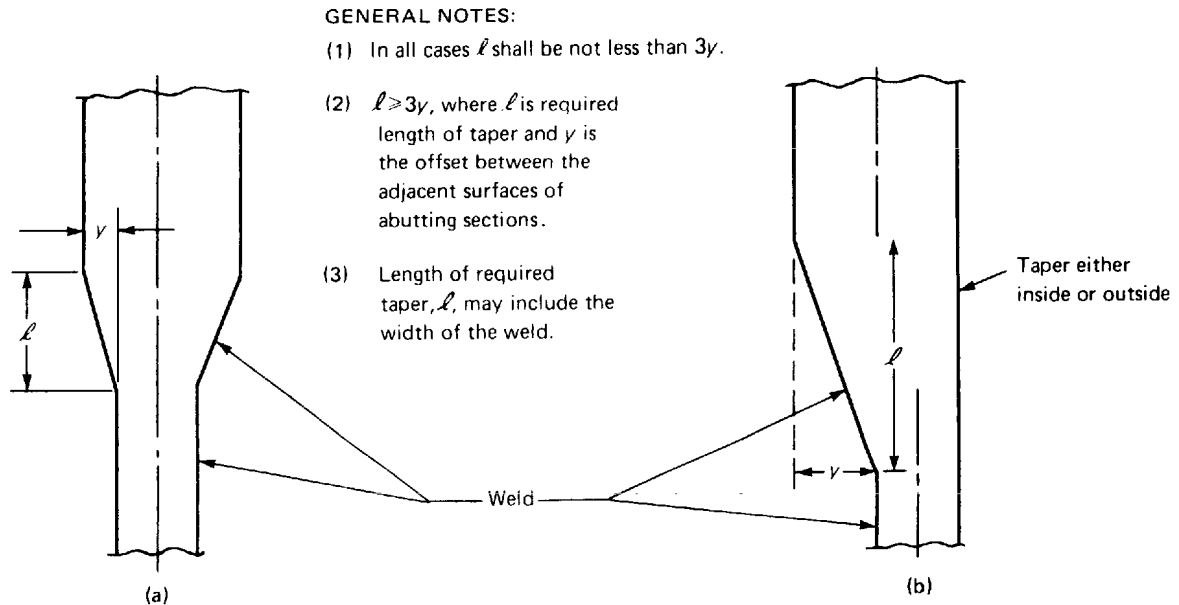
BUTT WELDING OF SECTIONS OF UNEQUAL THICKNESSES
